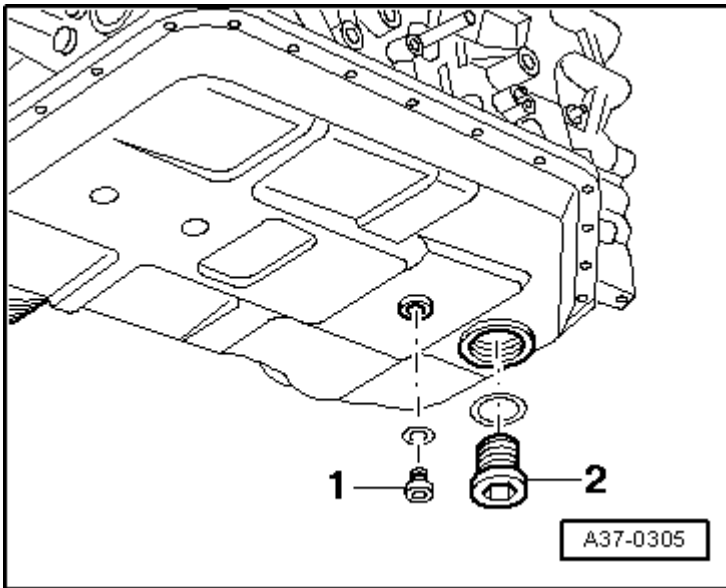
Identifying ATF Drain Plug And ATF Level Inspection Plug
